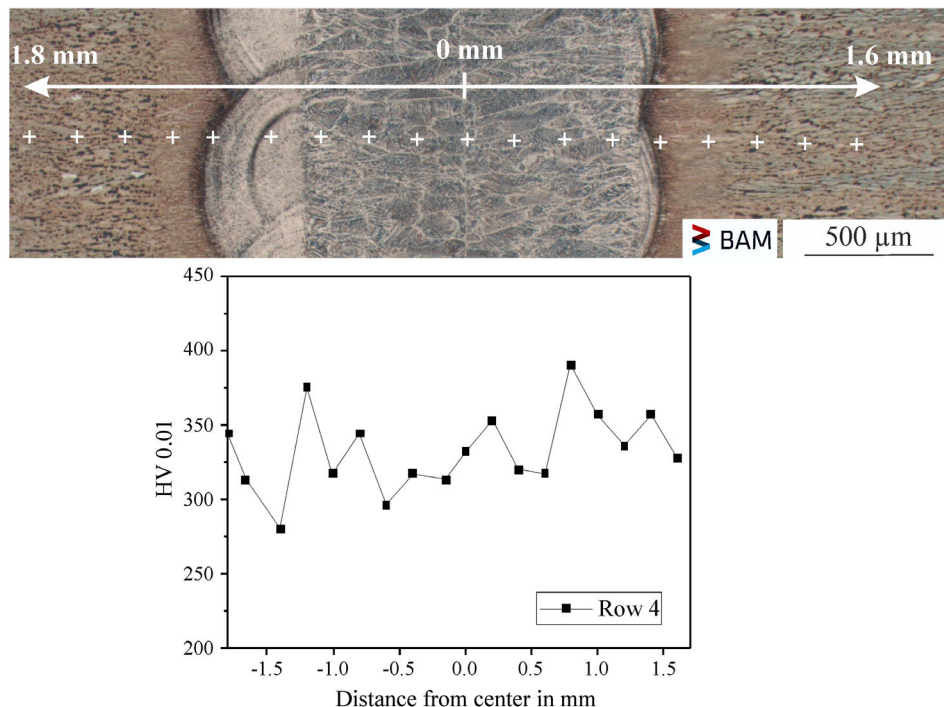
Cross sections of weld seam with hardness indents at a distance of 0.2 mm.
